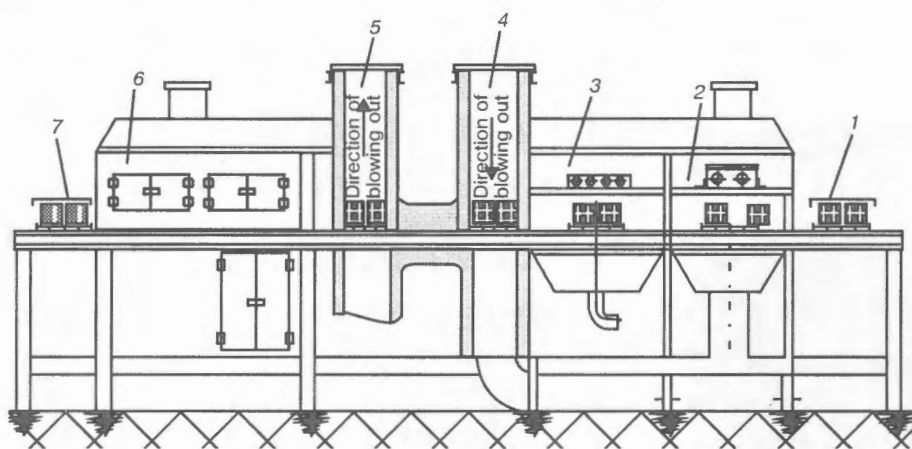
Schematic diagram of furnace for sintering tubular packs (existing): 1 — position of loading; 2 — chamber of fluxing; 3 — chamber of blowing out; 4 — chamber of preheating; 5 — chamber of brazing; 6 — chamber of cooling; 7 — position of unloading
